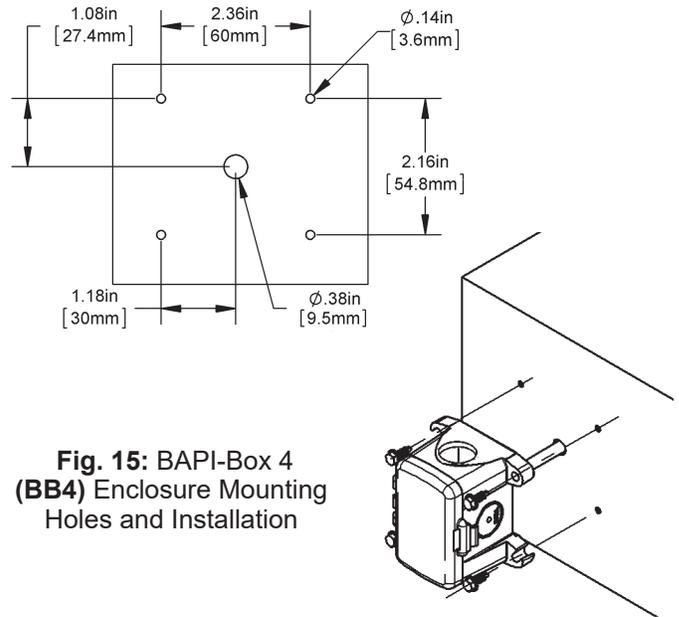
BAPI-Box 4 (BB4) Enclosure Mounting Holes and Installation
